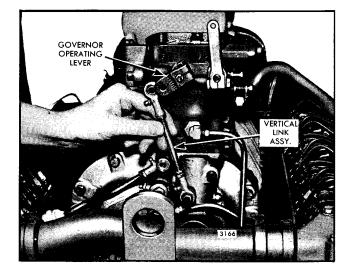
Checking Alignment Between Vertical Link Assembly and Governor Operating Lever
